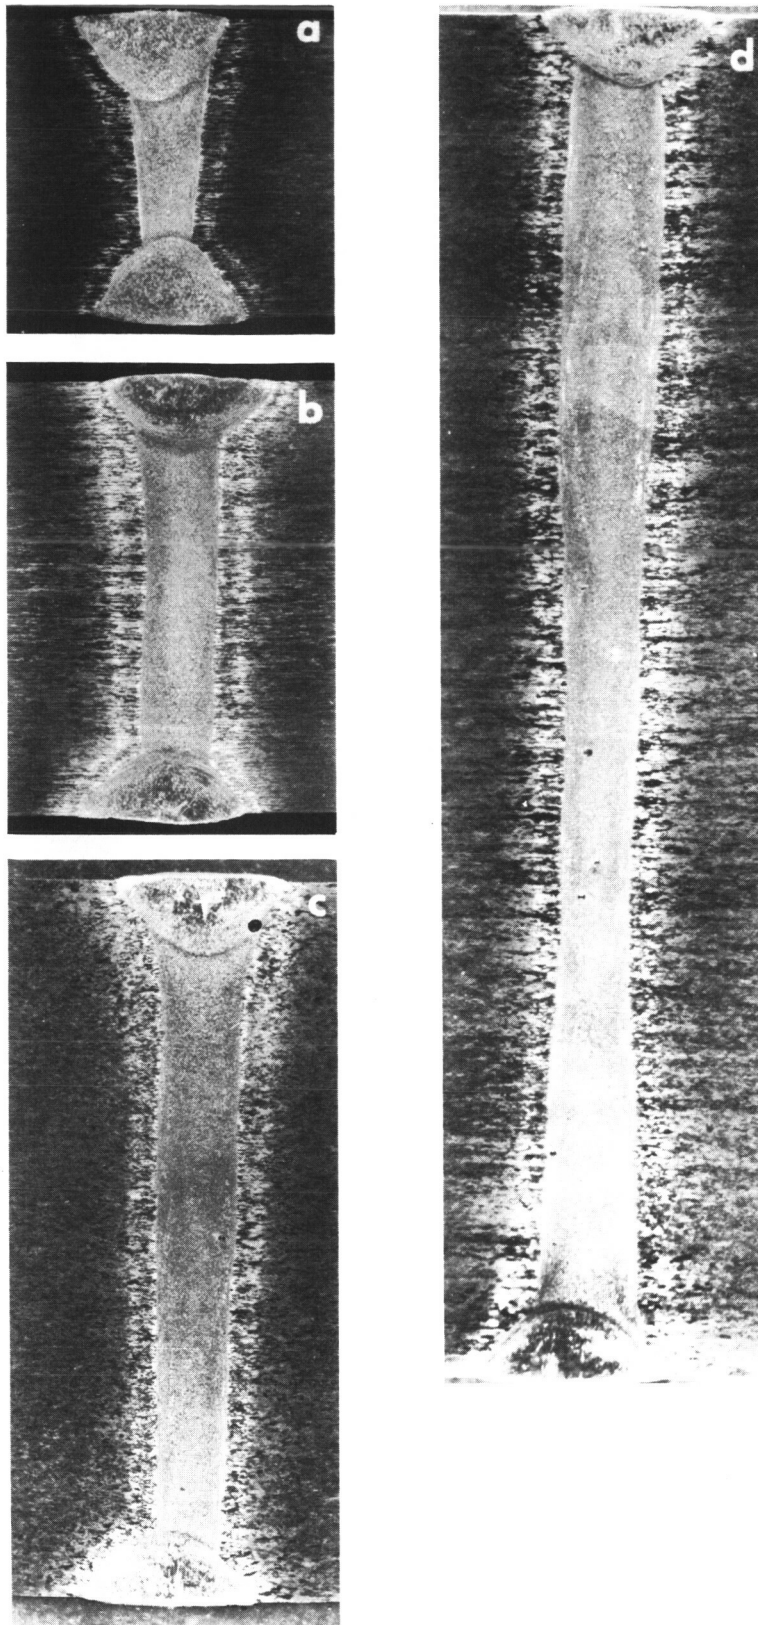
CROSS SECTION (3x) OF EB WELDS IN 1/2-IN. (a), 3/4-IN. (b), 1-1/4-IN. (c), AND 2-3/8-IN. (d) THICK 2219 PLATE WITH ROUNDED SMOOTHING PASSES FACE AND ROOT.
